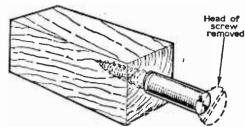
A suitable bobbin holder for use with a geared brace for winding.
